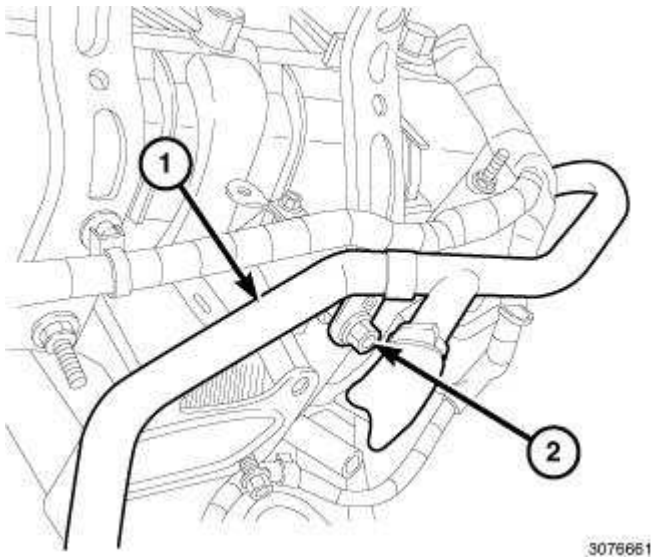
Heater Core Return Tube Upper Support Bracket Retaining Nut & Tube
